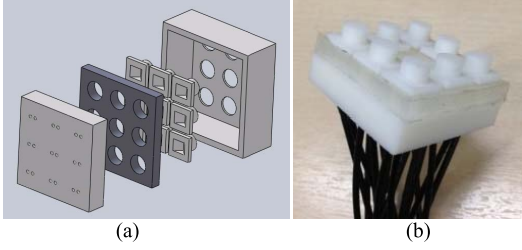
(a) CAD drawing of proposed sensor, (b) photo of proposed sensor tip.
